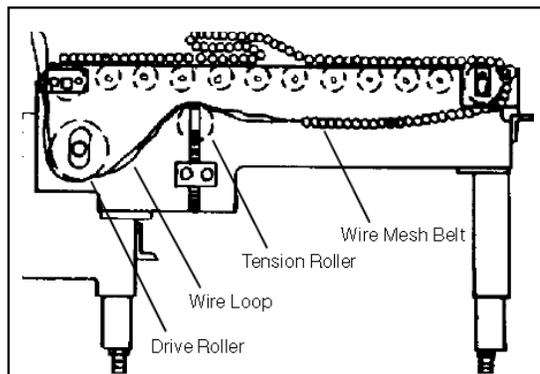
Feed Wire Loop Over Tension Roller and Under Drive Roller
